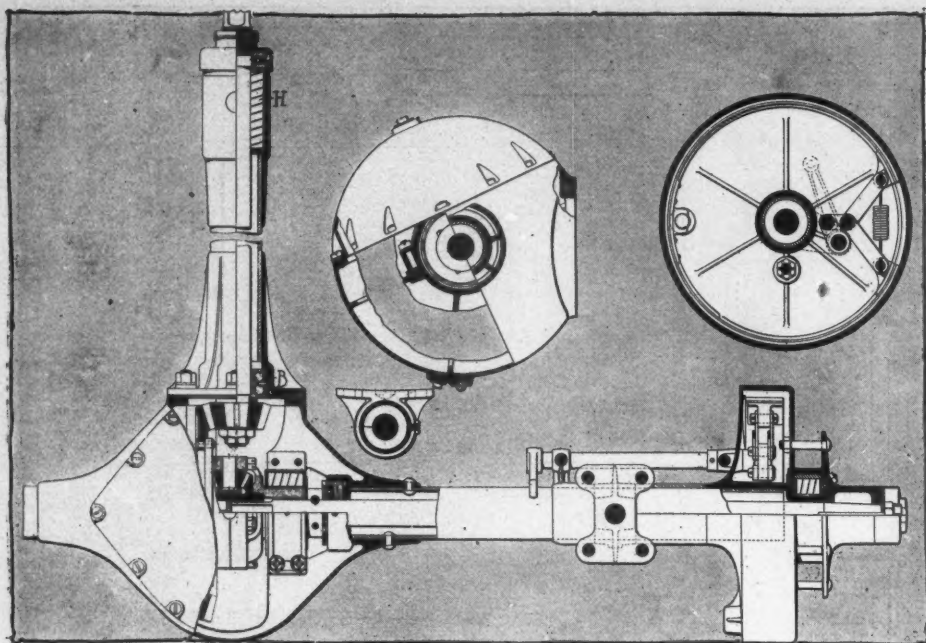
SHOWING INTERESTING DETAILS OF COLE 30 REAR END CONSTRUCTION
